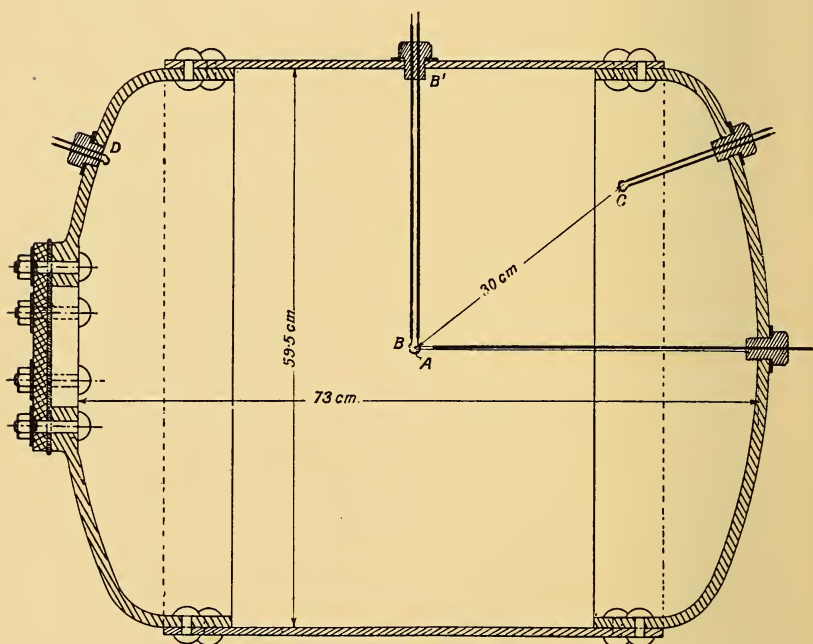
Professor Hopkinson's Gas Explosion Apparatus.
